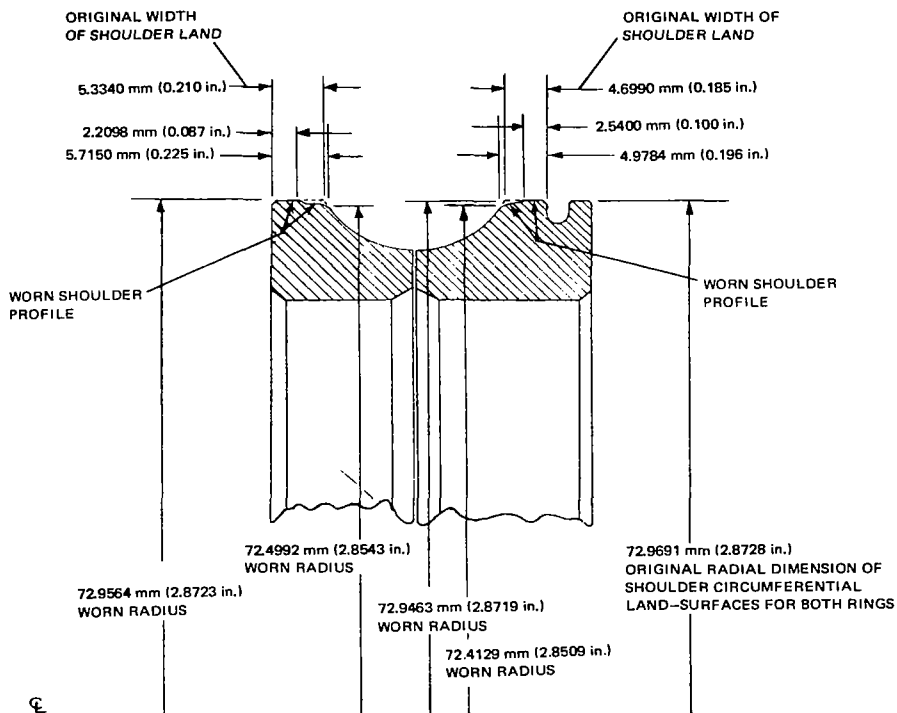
Profile of Worn Inner-Ring Land Surfaces
